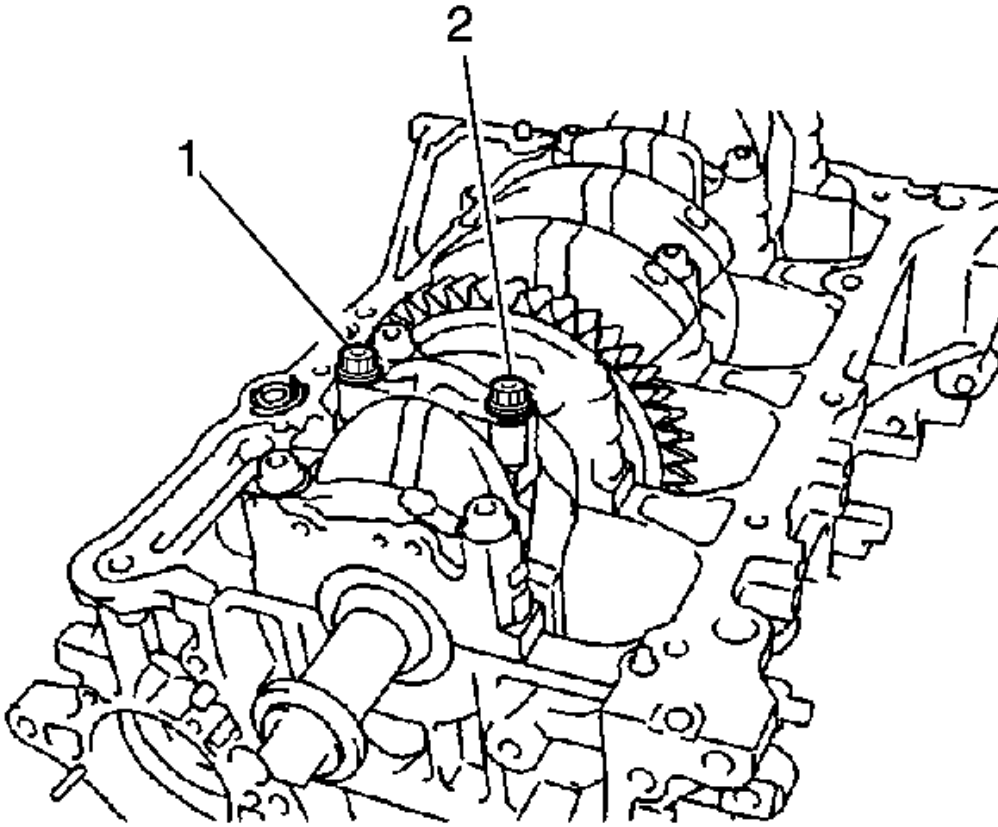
View Of Loosening Connecting Rod Cap Bolts
